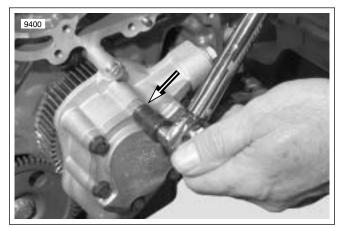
Oil Pump Cover @ 9.7 Nm (86 in-lbs)
